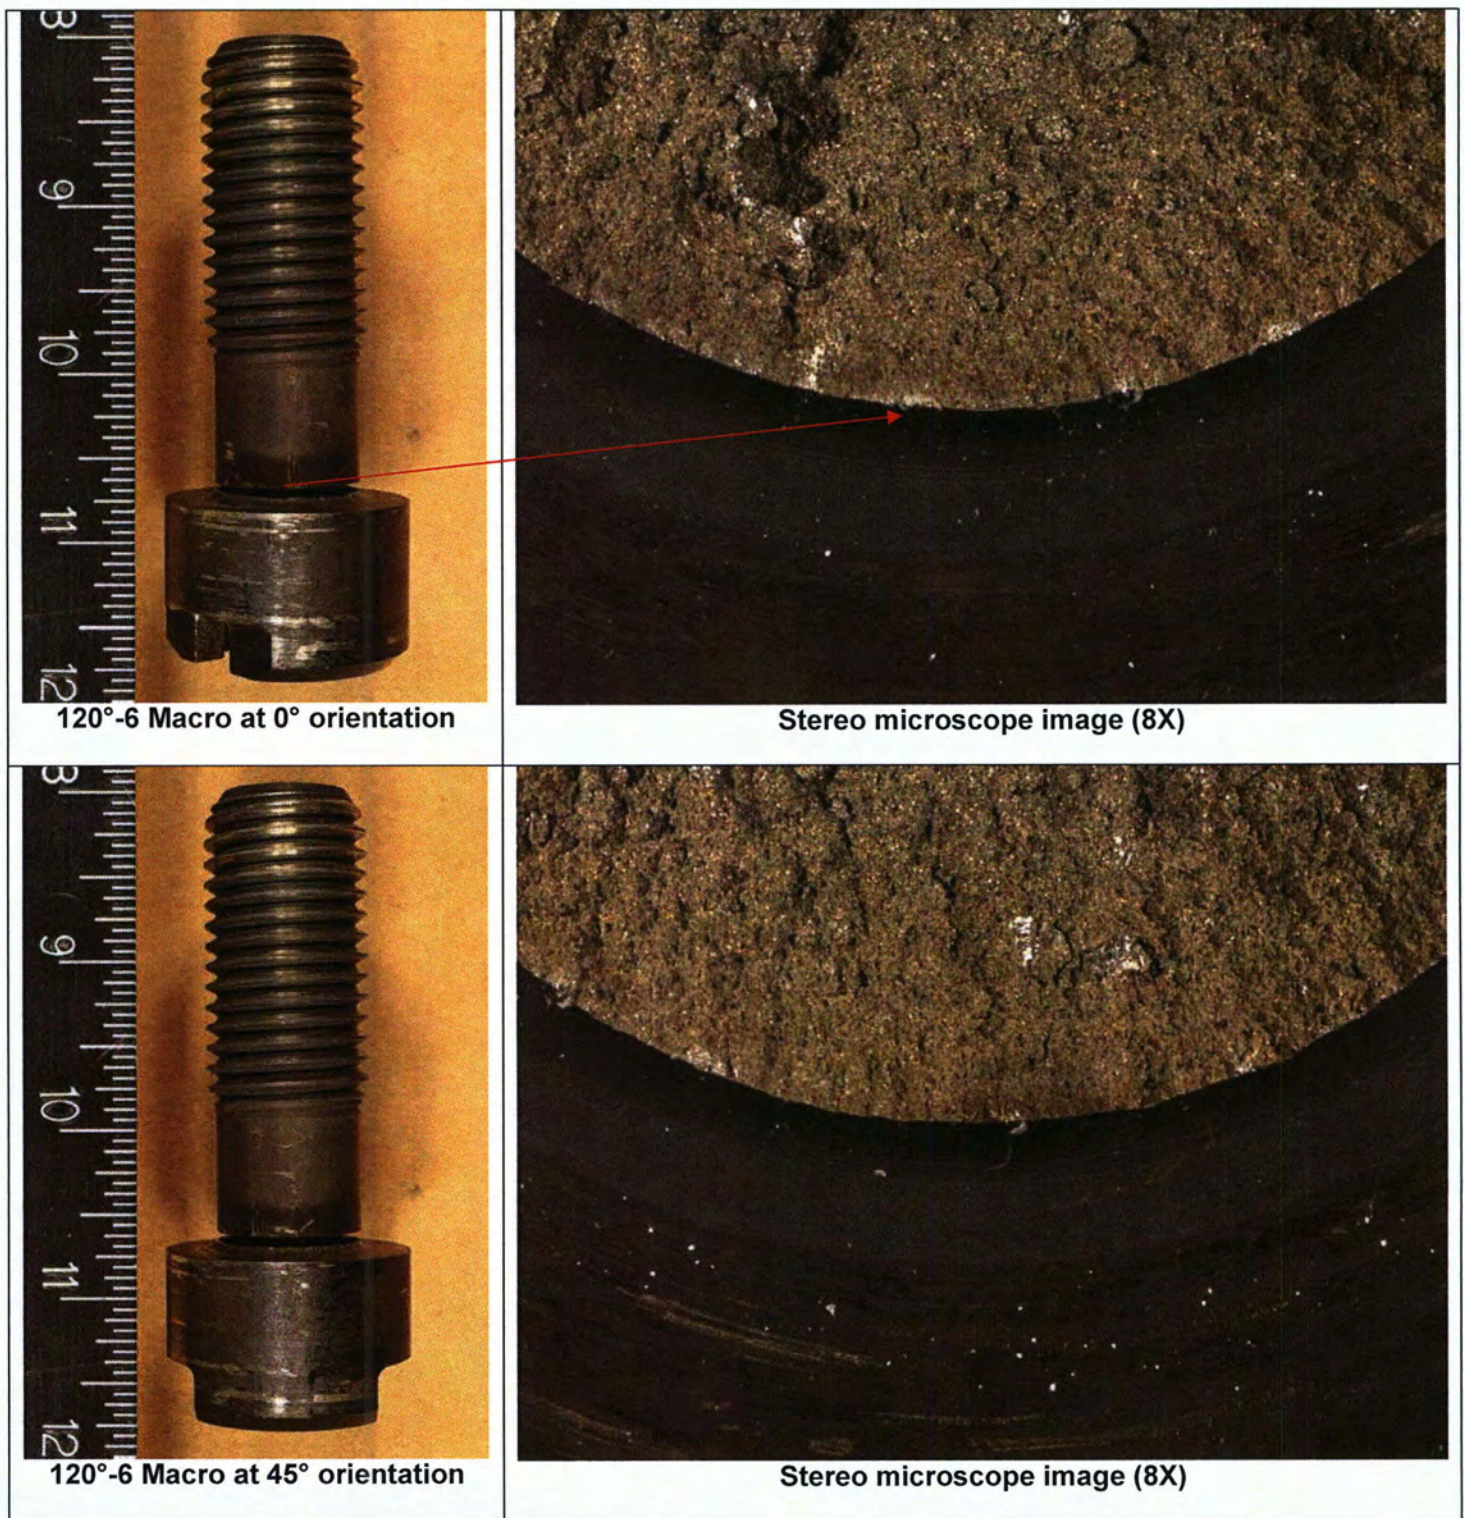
Macro and stereo photographs of bolt 120°-6 taken at 45° increments.
